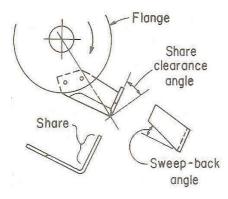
Three views of an L-shaped blade for rotary tiller [11]
